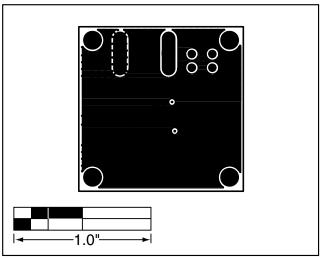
MAX2645 EV Kit PC Board Layout—Power Plane
